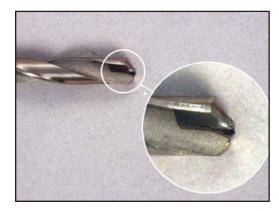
Trying to drill boron steel using a drill bit with a carbide insert resulted in cracking the insert, no matter what speed was used.
